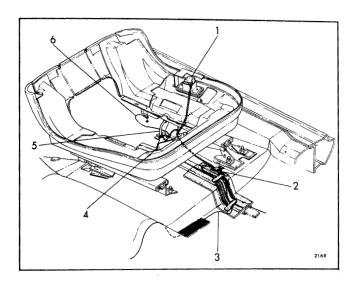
Horizontal Bucket Seat Wiring - "B & C" Styles
